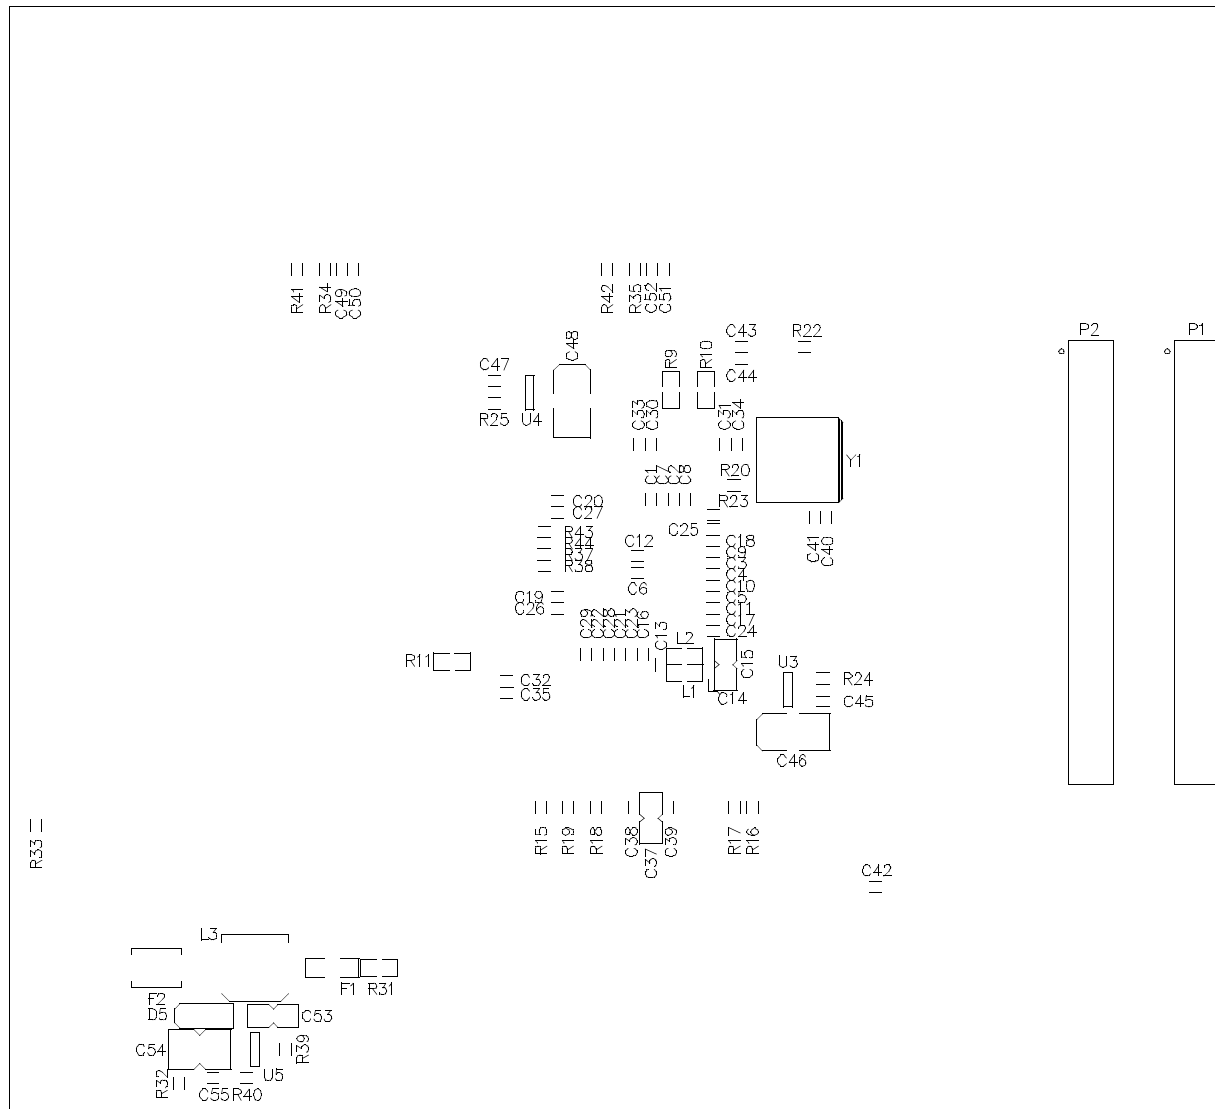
S5U13719P00C100 Board Layout - Bottom View
